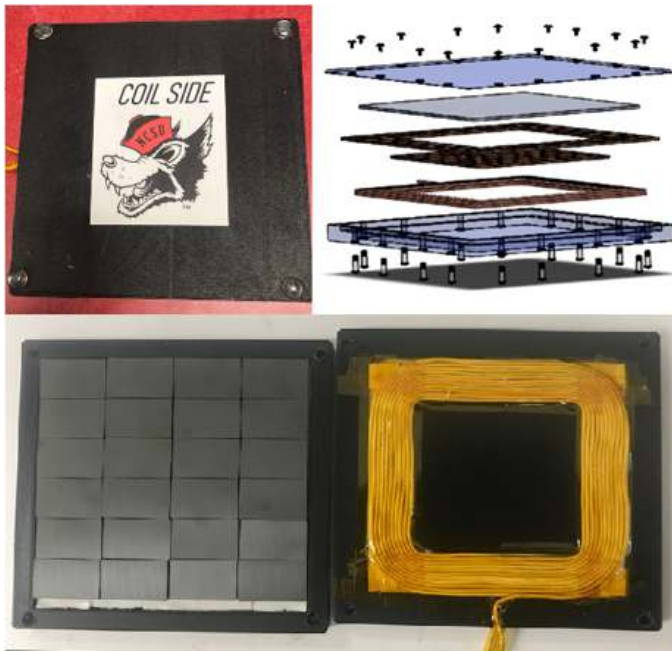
Coil enclosure exterior (top left), Solidworks exploded view (top right), internal ferrite shielding (bottom left) and coil with Kapton tape (bottom right).
